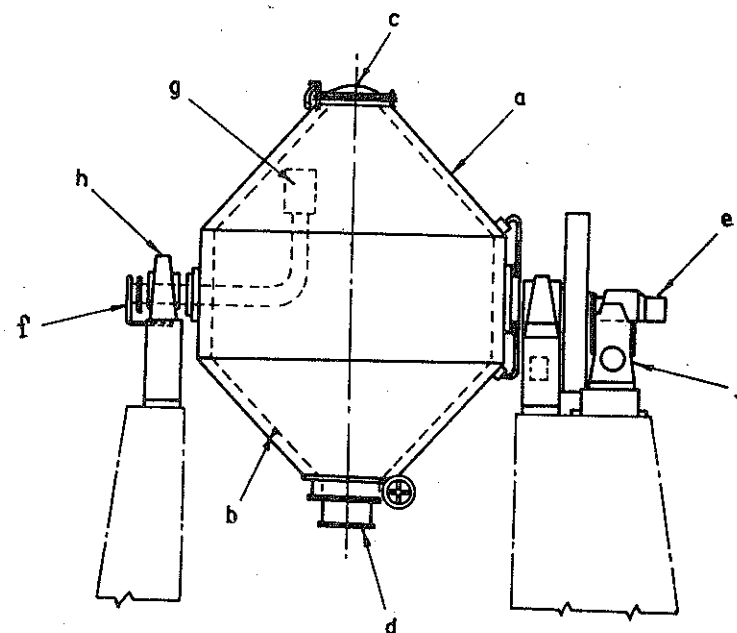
Tumbler dryer (a) conical shell (b) jacket (c) cover (d) discharge (e) steam inlet (f) vacuum connection (g) dust filter (h) bearing (j) drive system
